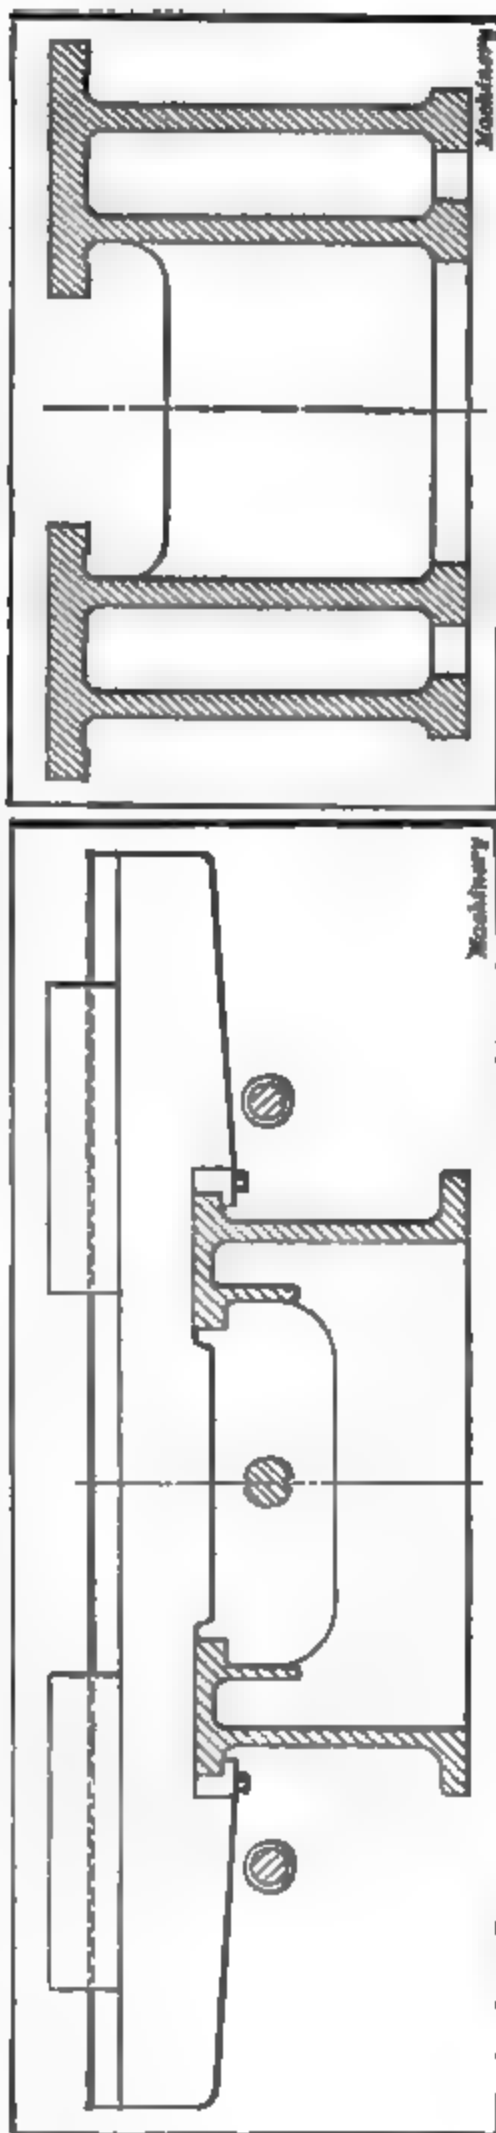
Bed of Large Lathe with Internal Ribbing, as built by Halses & Co., Manchester, England
